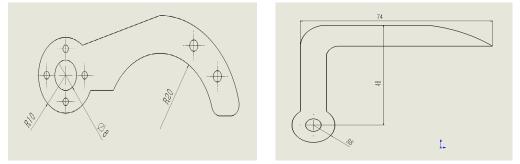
Capture mechanism design drawing Figure 5: Design drawing of hook mechanism
